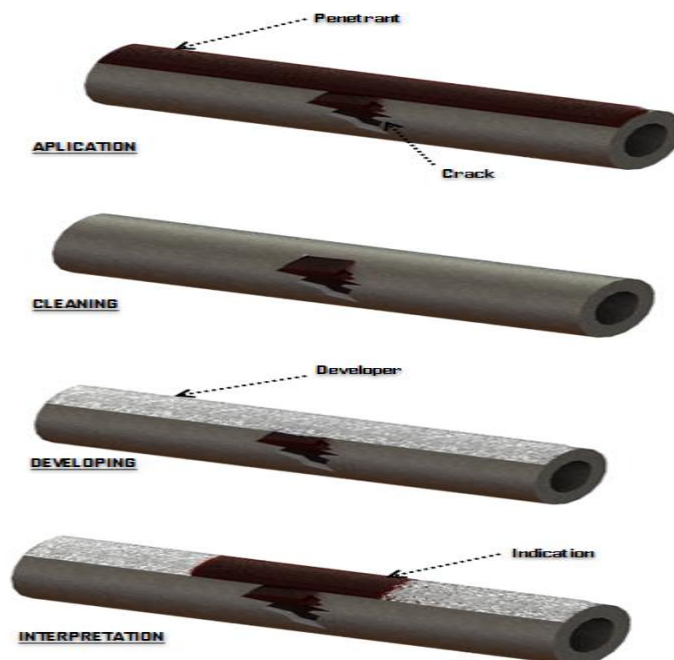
Principle of operation of Liquid penetrant inspection technique [42].
